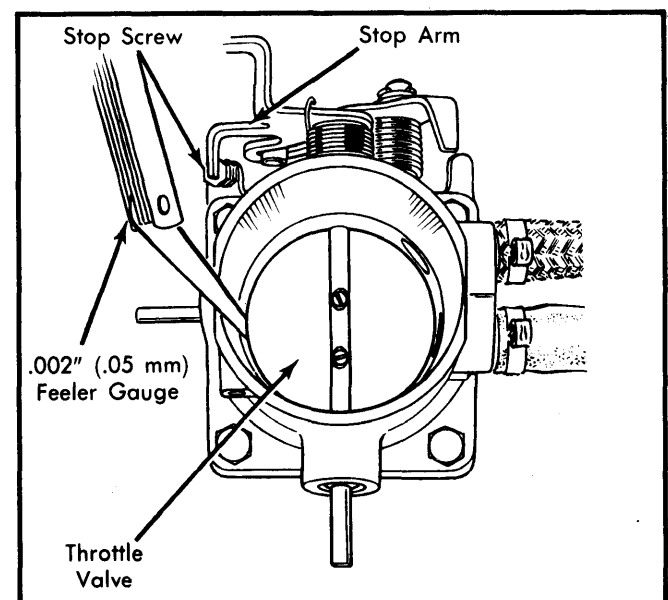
Adjusting Throttle Valve Clearance (Jaguar Models Only)
